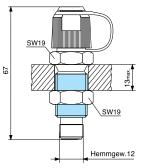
for solderless screw-in pipe connection acc. to DIN 2353,
